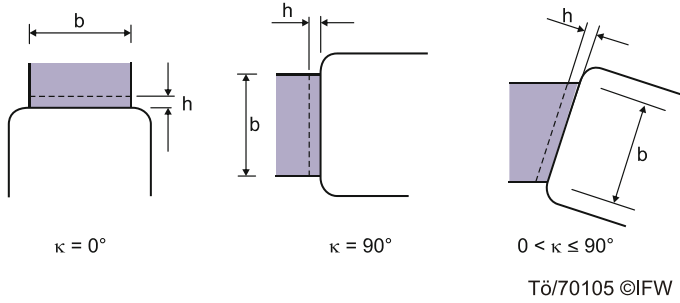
Undeformed chip cross section with undeformed chip parameters
